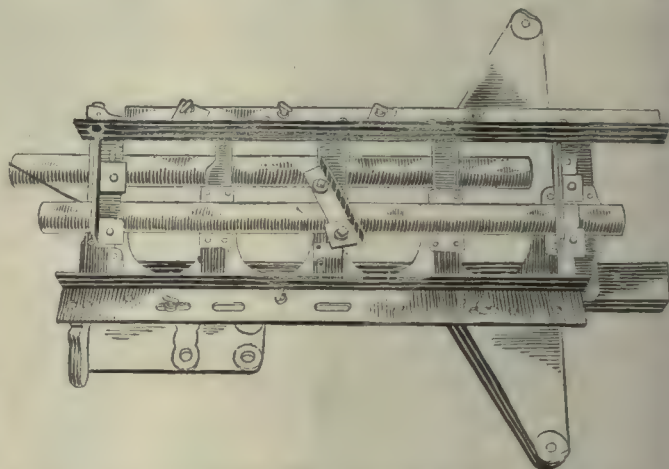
CRANKCASE WITH ANGLE IRON AND BEARING MANDRELS IN PLACE
